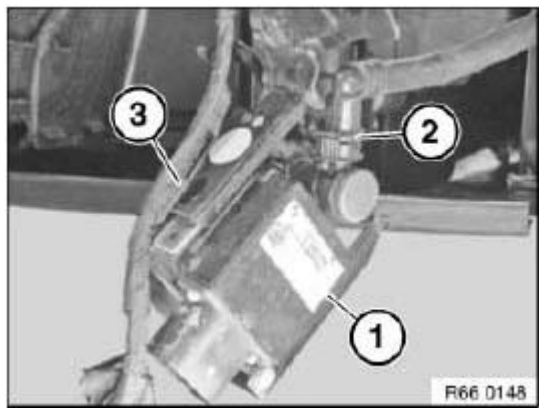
Identifying Night Vision Camera, Hose Connection And Cable Fastener
